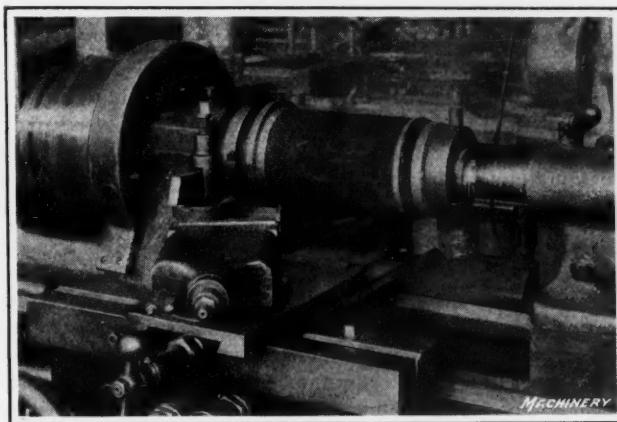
Engine Lathe used for finish-turning Avery Tractor Engine Cylinder Liners
